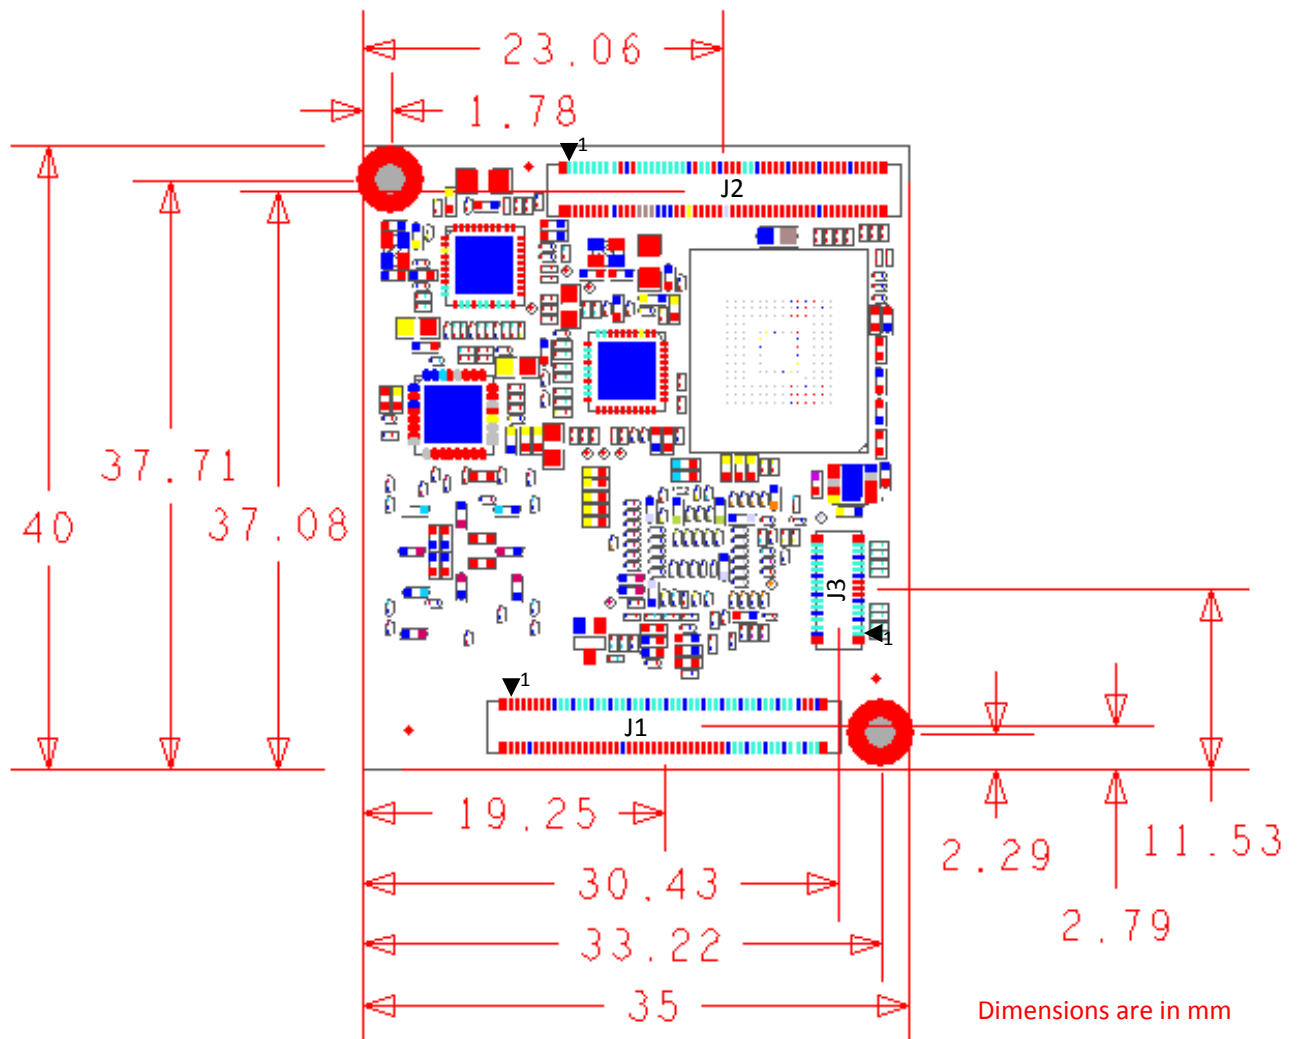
Mechanical Dimension from bottom side (dimensions in mm)
